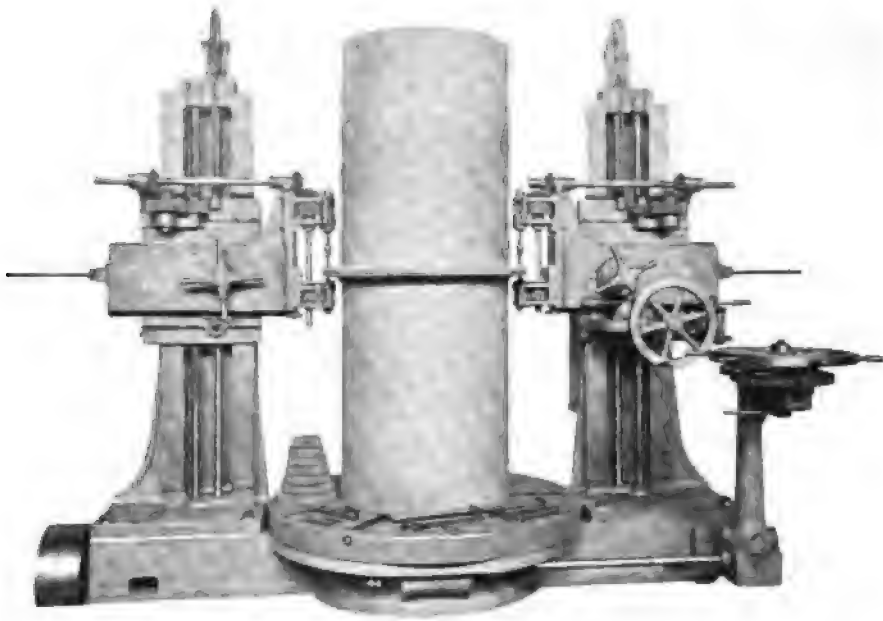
BOILER FLUE FLANGE DRILLING MACHINE. (Rushworth & Co.)
